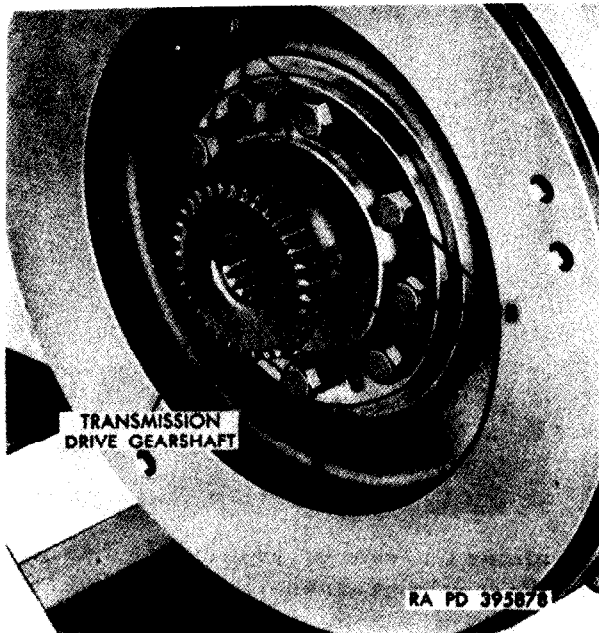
Removing or installing generator drive adapter and associated parts.
